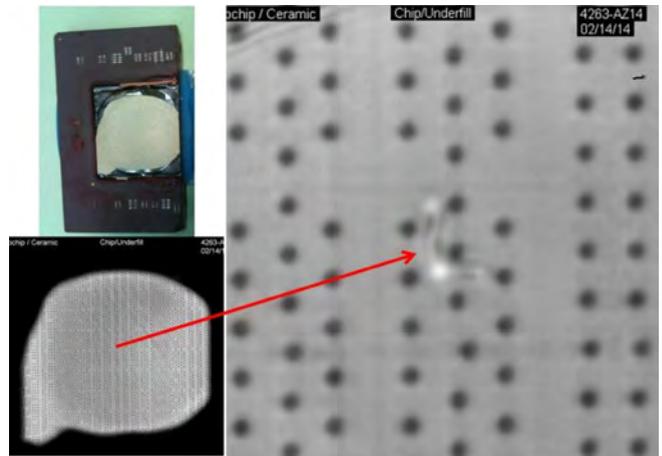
Optical (top left) and C-SAM images for FC-CGA 1752 I/O assembly after removal of the heat sink, showing the integrity of the flip-chip assembly and minor defect anomaly.
